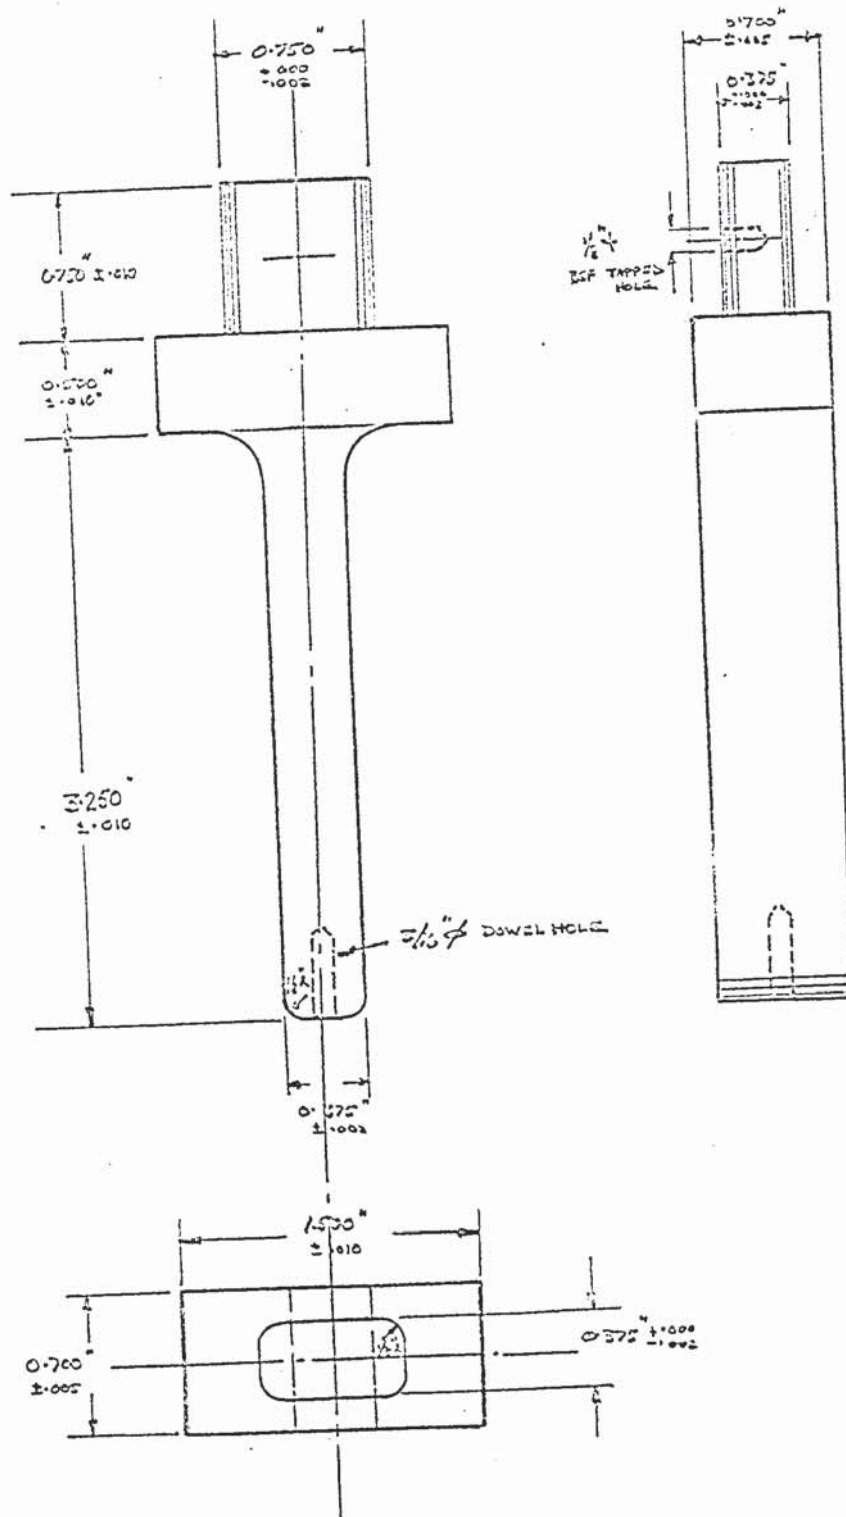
Dimensions of modified punch for roller die assembly.
